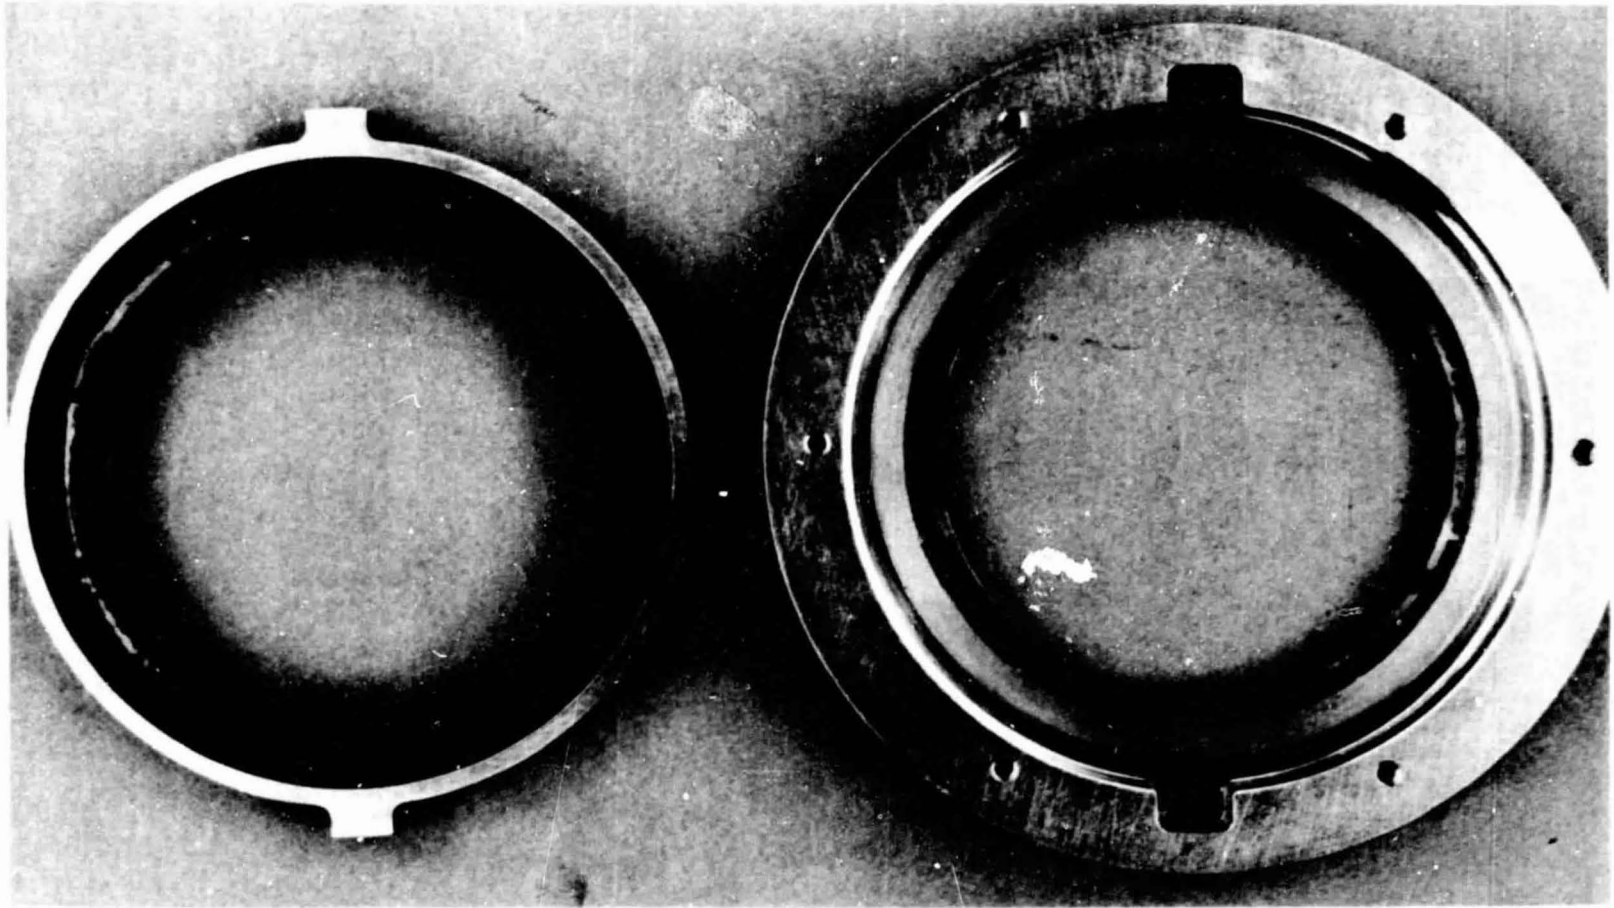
Pump End Secondary Seal, P/N 7R0011526, S/N 047902,
